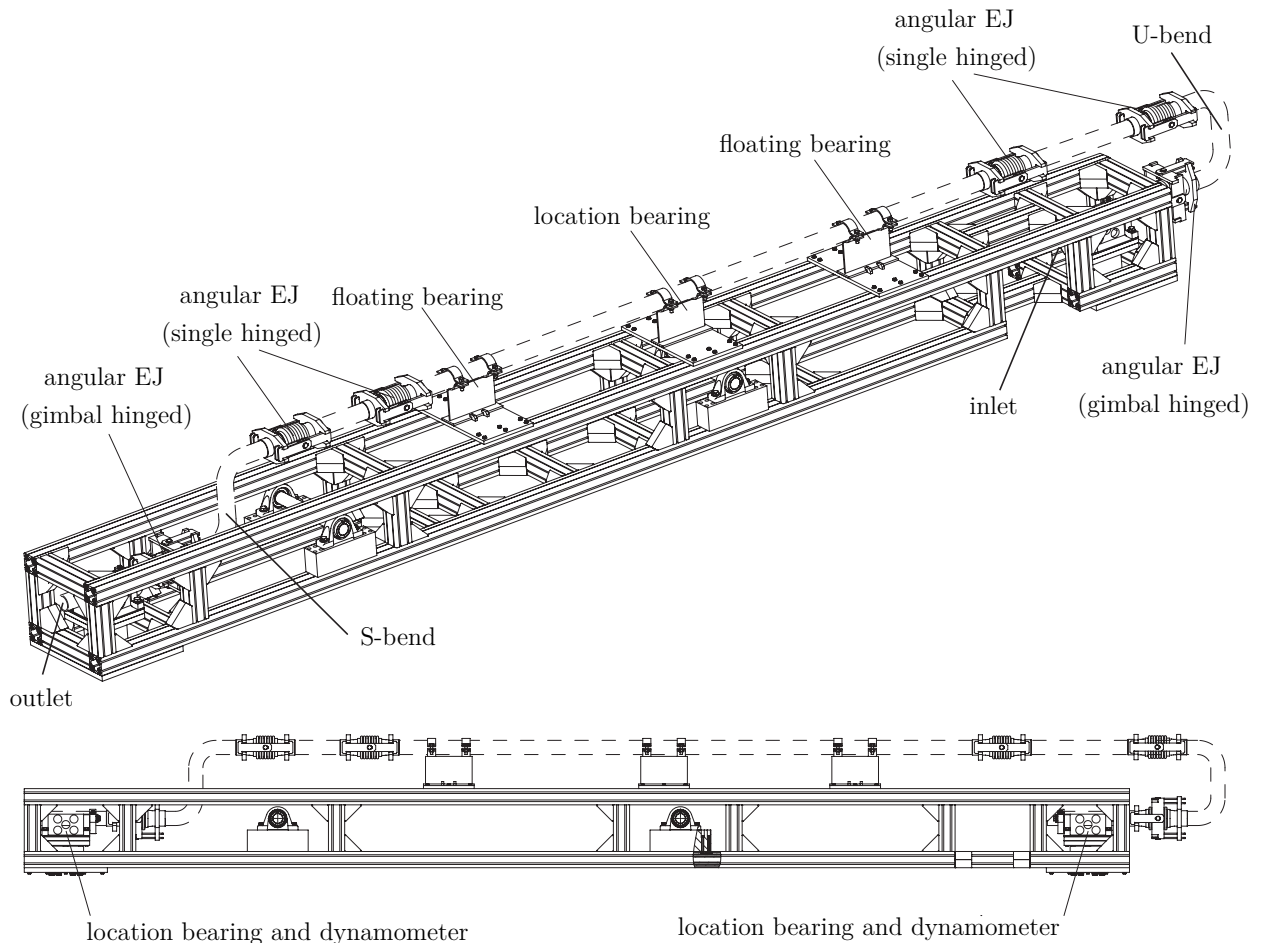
Technical drawing of the traverse with assembled angular expansion joints; isometric view (top) and side view (bottom)
